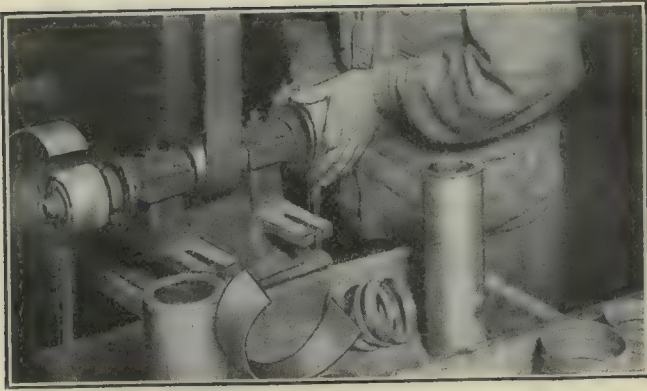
"SNAGGING" INSIDE OF RING CASTING
